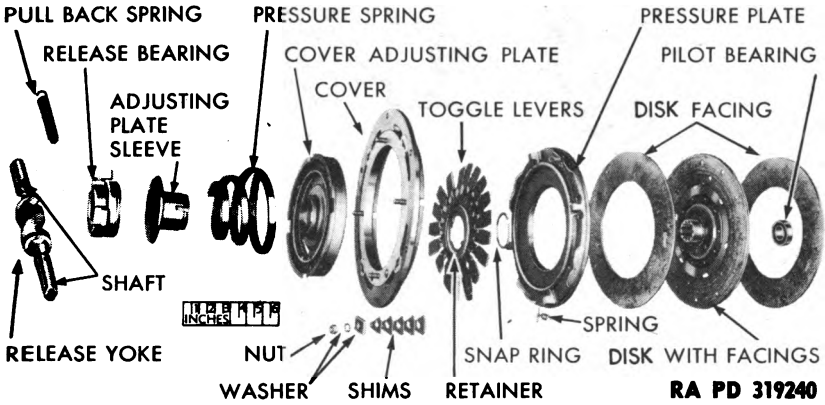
Single Large Coil Pressure Spring Type Clutch.
